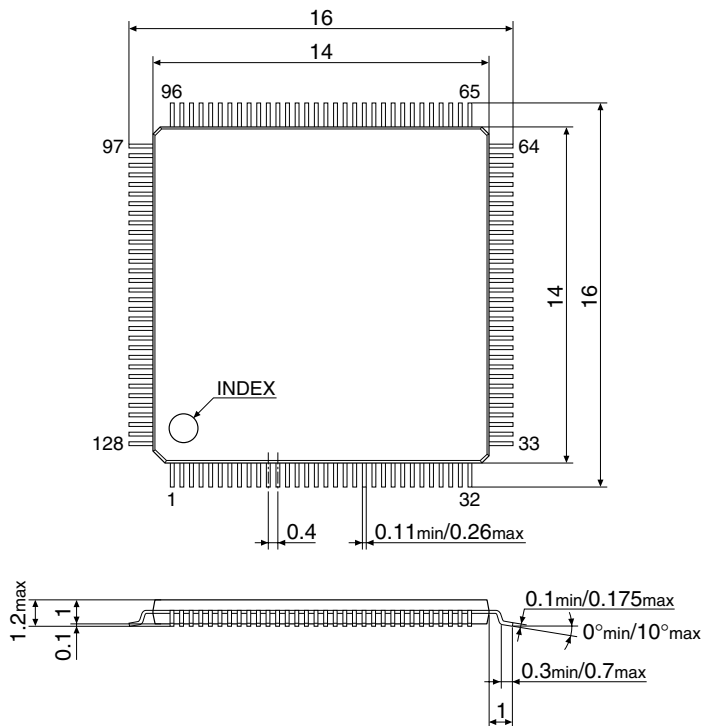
TQFP15-128pin Package Dimensions
